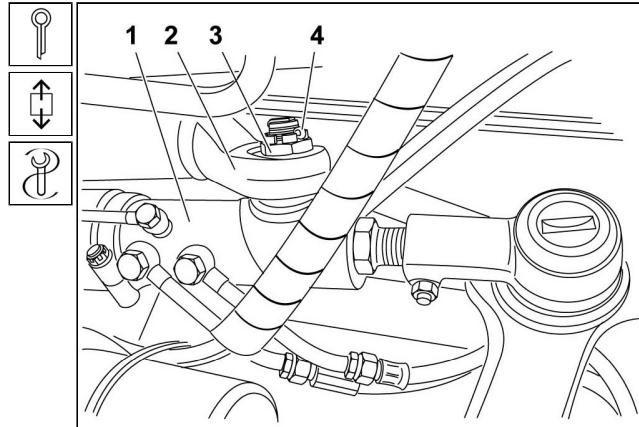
Connection of power cylinder pull rod with booster - removal
